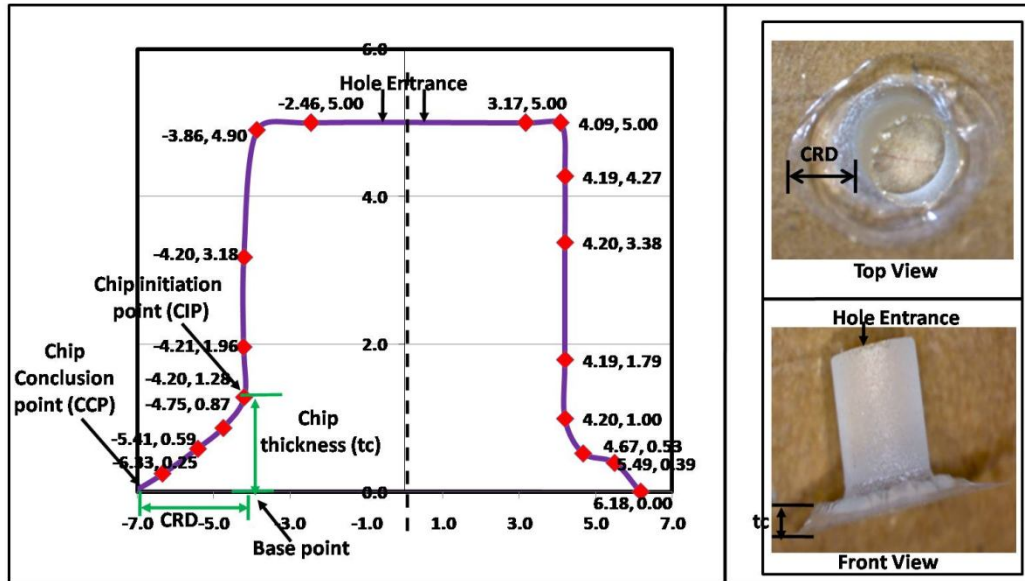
CMM diagram of machined rod which is drilled by CD process: Depicting of chipping (CRD and t_c) measurements with its microscopic images of the machined rod in front and top view
